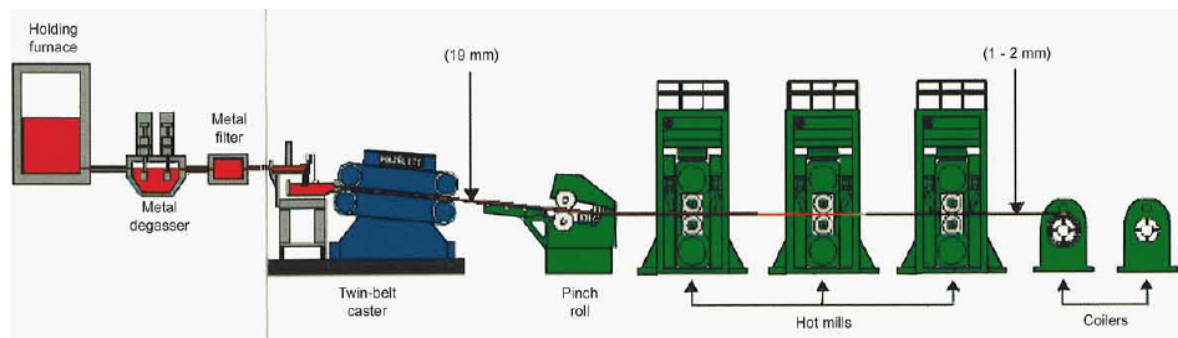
Twin belt casting line for production of coilable strip [12]
